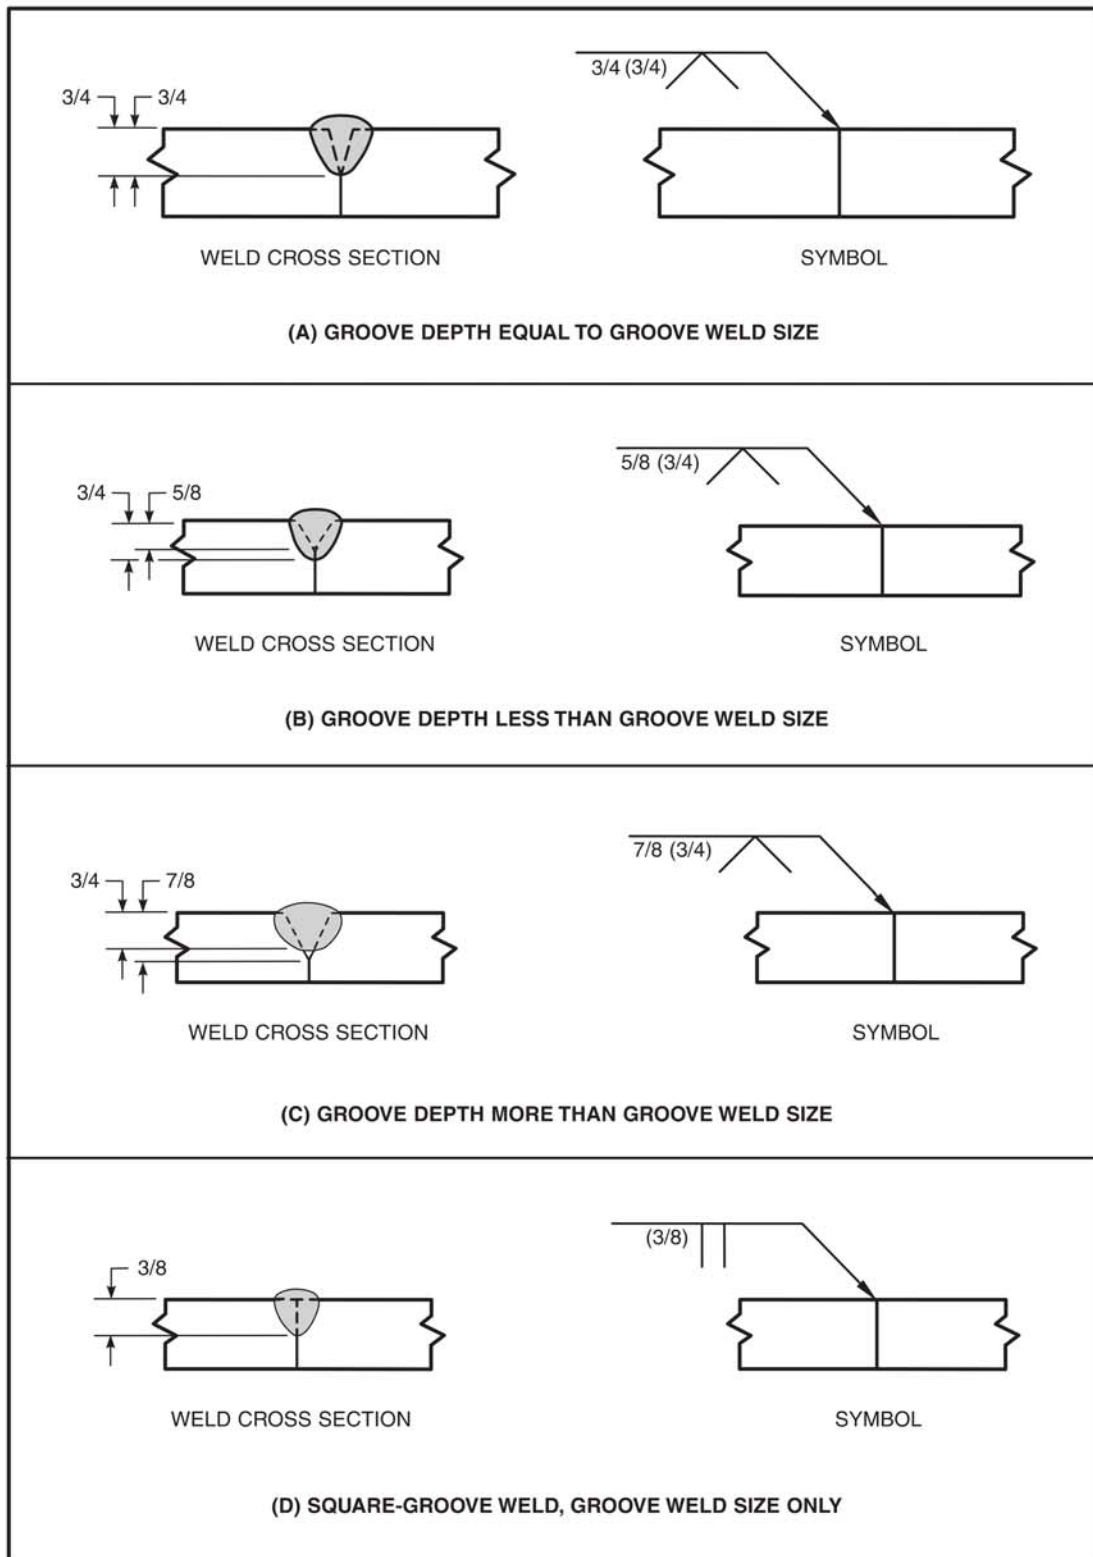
Application of Groove Weld Size Related to Groove Depth
